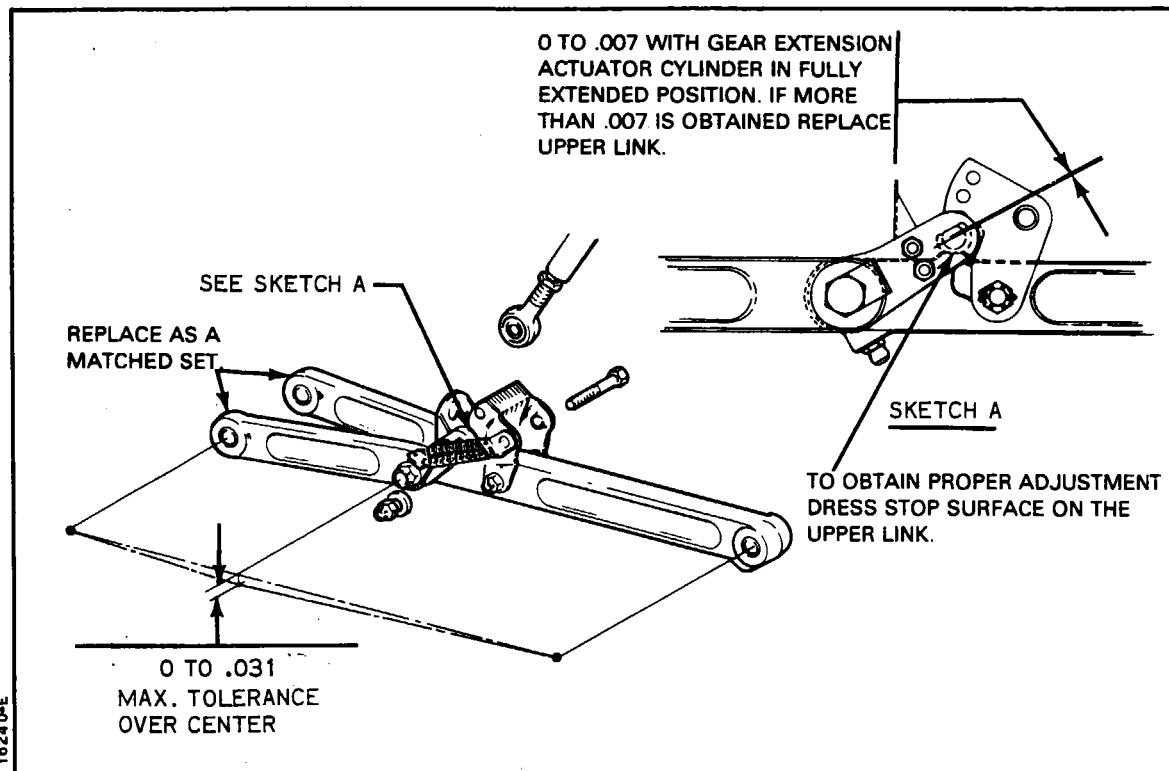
Adjustment of Main Gear Drag Link and Latch Assembly
